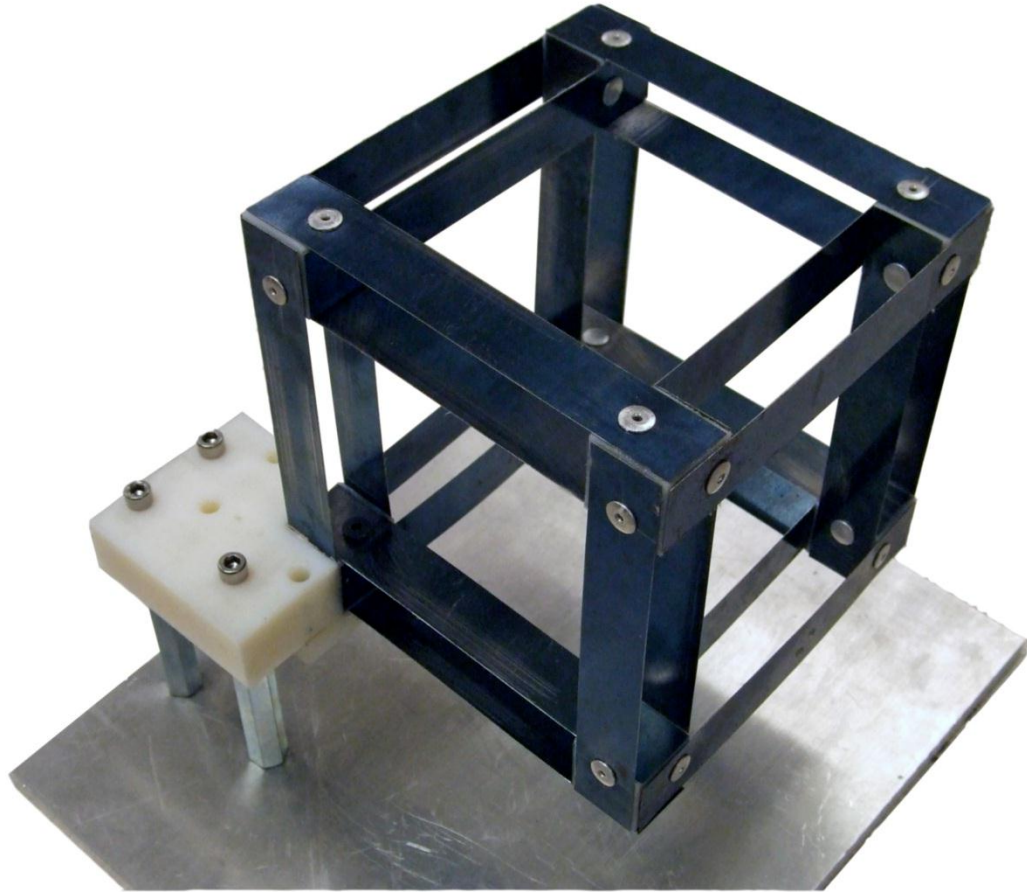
Second XYZ Flexure Mechanism Physical Assembly
